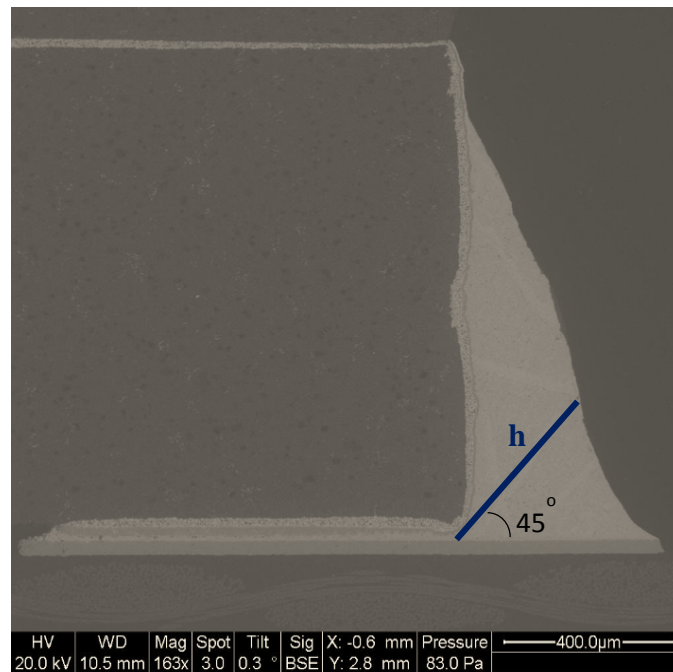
Effective solder height by sectioned view of CLCC solder joint.
